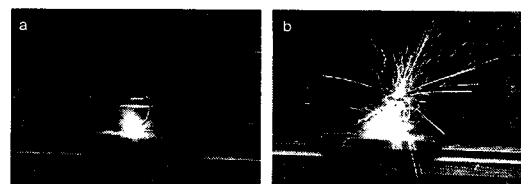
Spattering in laser welding of aluminized(a) and Zn coated(b) steel.
